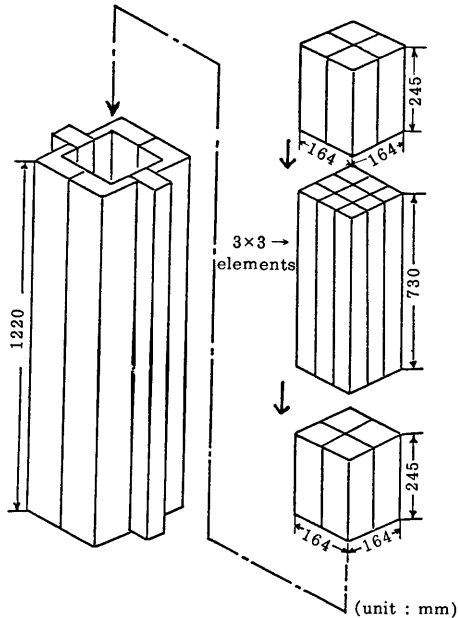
Enlarged central stringer and thorium assembly (3×3 elements)
